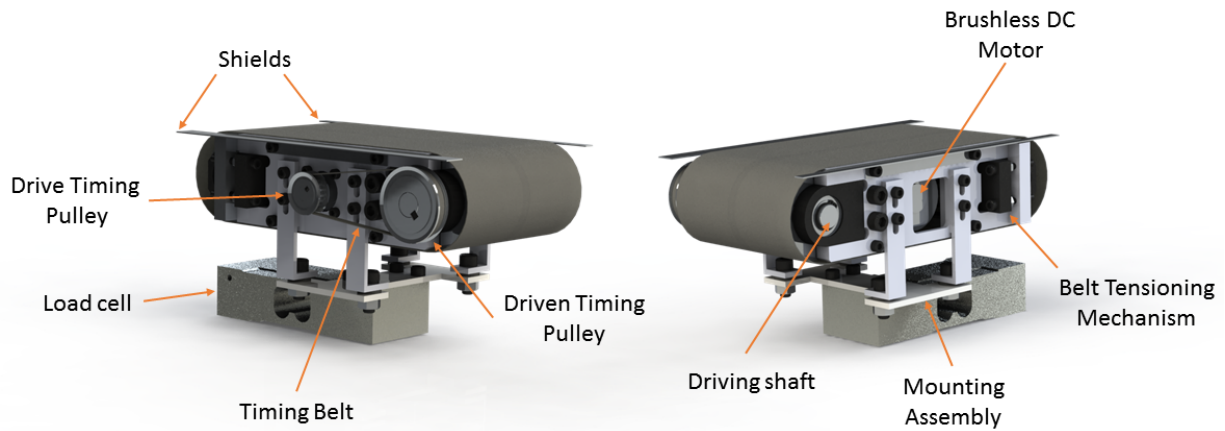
Rendered isometric views of the second conveyor belt design iteration mounted on a load cell.
